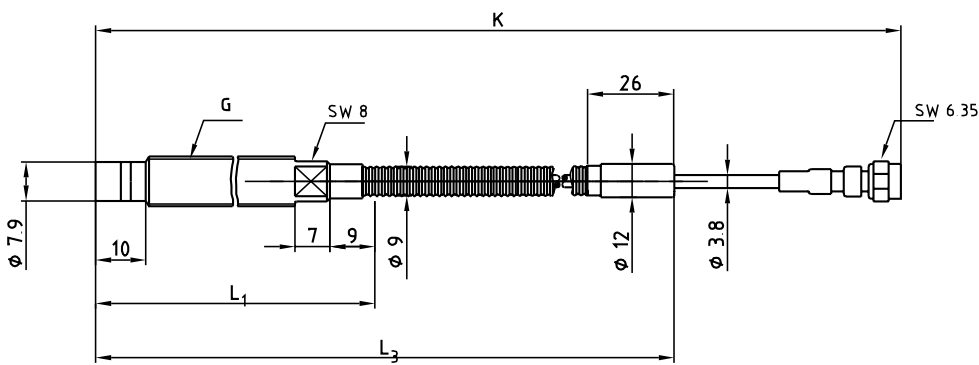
Displacement sensor DS-1052 with stainless-steel corrugated tube protection (basic length L3 = 700 mm); the end of the corrugated tube may be prepared for 12 mm cutting-ring fitting (version A) or for use of casing feed-through AC-2551 (version B)
